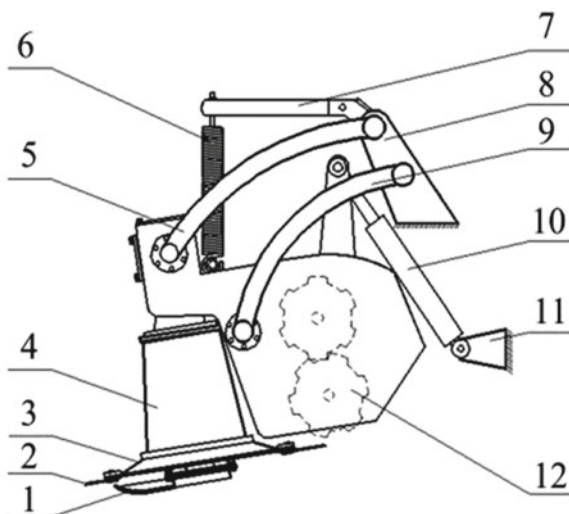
9GZ-1.2 Profiling system structure. 1. runner; 2. cutter; 3. cutter head; 4. roller; 5. upper connecting rod; 6. floating spring; 7. bracket; 8. frame; 9. lower connecting rod; 10. hydraulic cylinder; 11. hydraulic cylinder base; 12. crushing roller
